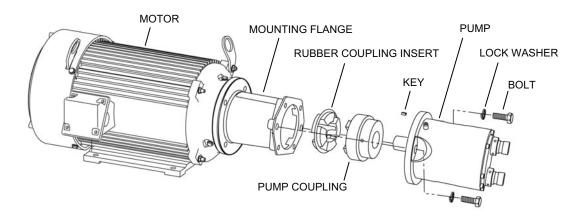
Removing Metal-Body High-Pressure Pump from Mounting Flange.
